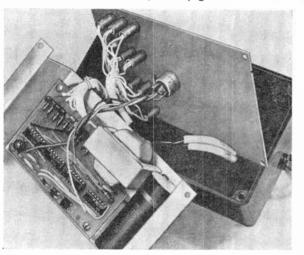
(right). Finished layout with parts called out in Parts List. Other arrangements can be used if desired.
